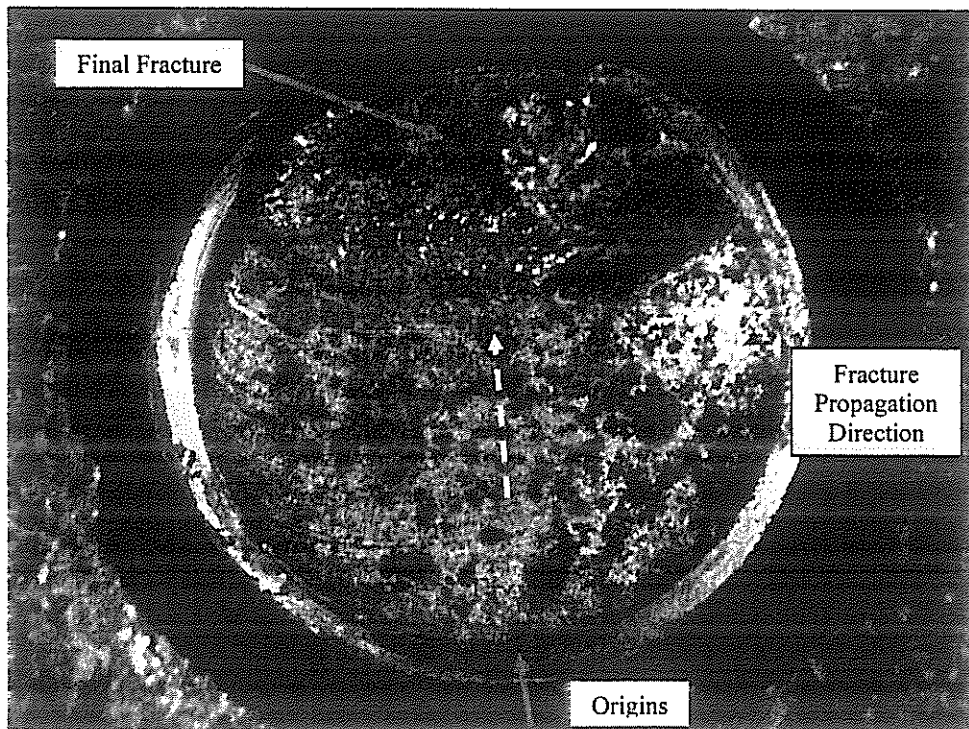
Bolt 2 – fracture features revealed that breakage occurred in unidirectional bending fatigue, with origins at a slight angle to the hub axis – centerline is down
